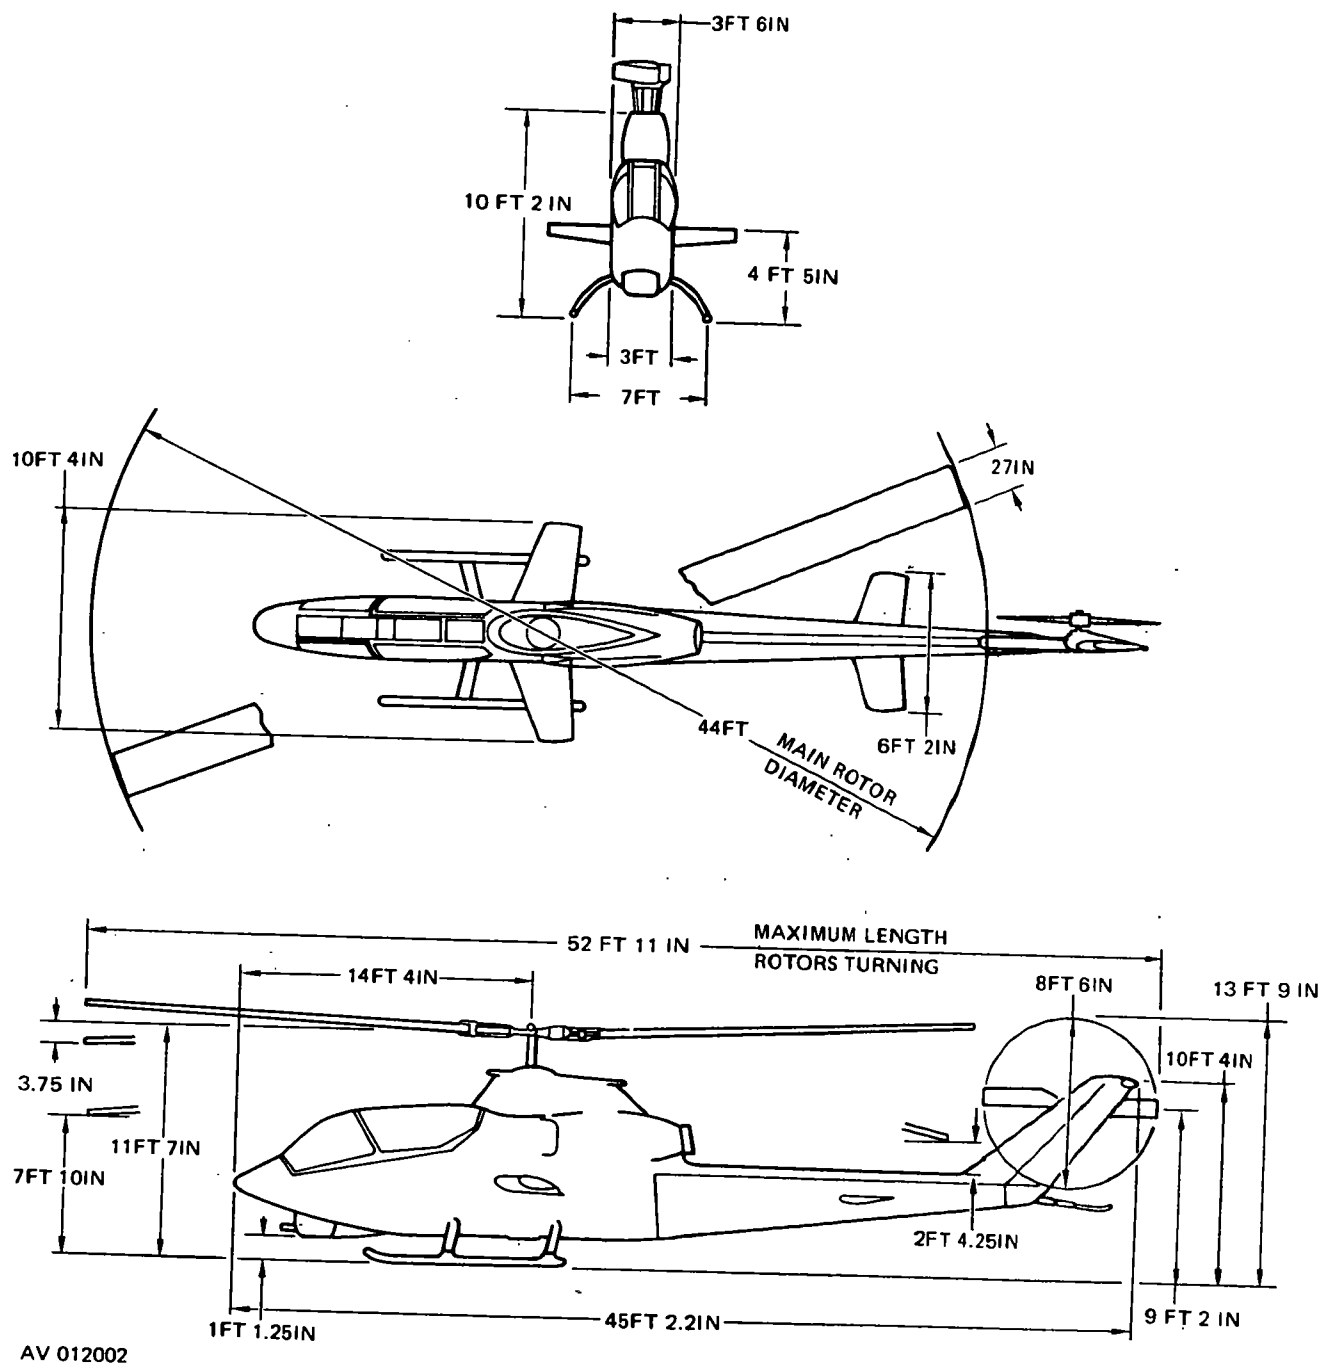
Principal dimensions, AH-1G (Hueycobra)
